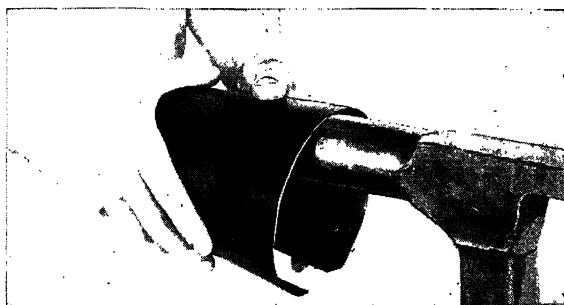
Forming a cone-shaped vessel on a beak-horn stake. Cylinders are formed in a like manner
